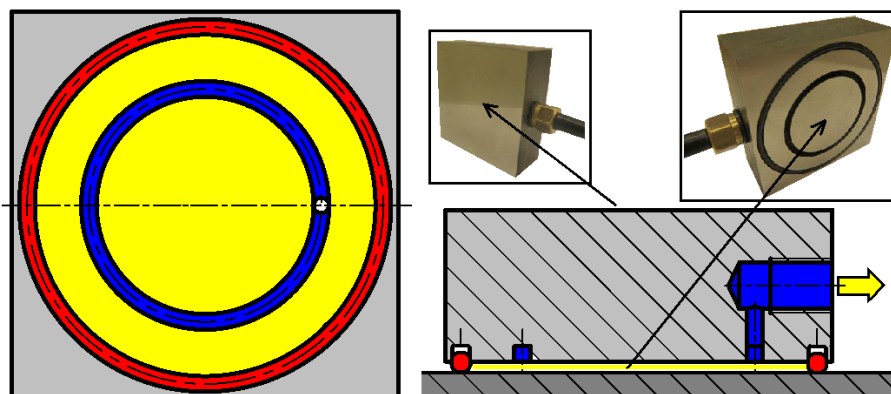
Structure of specimen A with vacuum fixing system [1]
